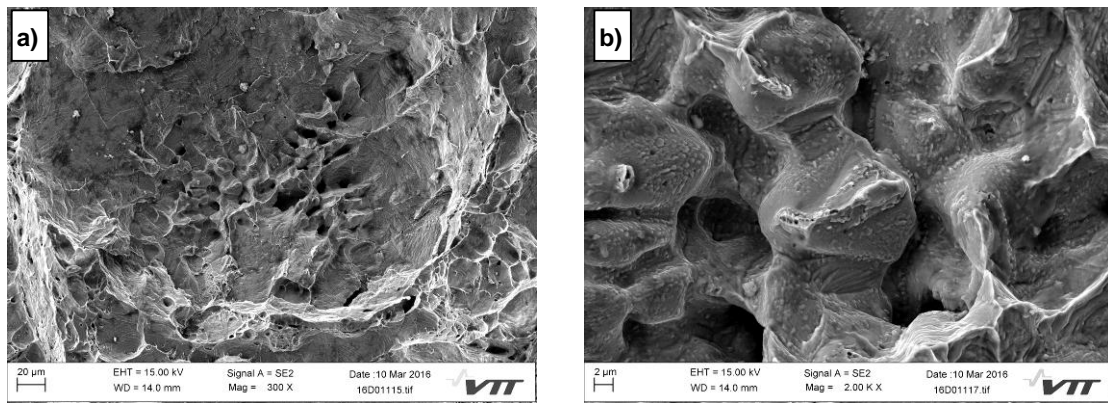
In a), a SEM (secondary electron) image of the fracture surface of the J-R test specimen JR1 showing another example of an area where the crack has propagated in the weld metal side of the joint. At the bottom of the large dimple there is a small weld defect and some pores. Detailed view of the weld defect is shown in b).
